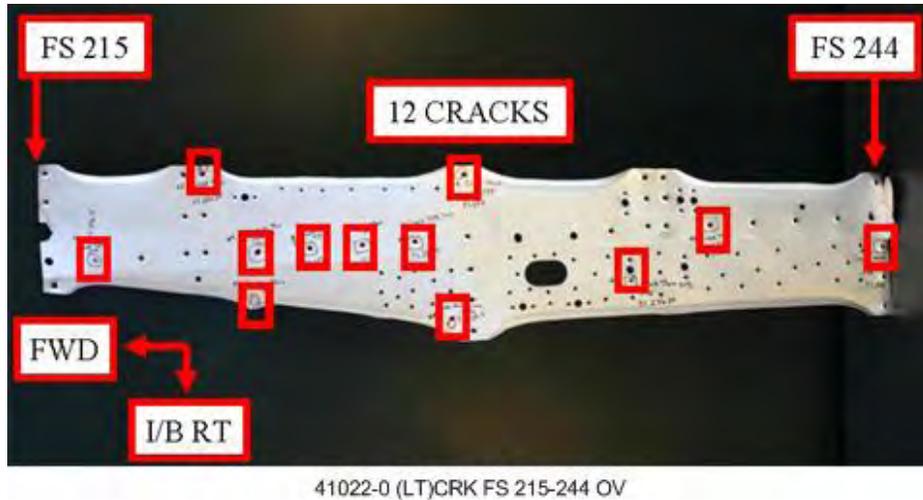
Location of 12 Cracks on the Left Inboard Floorboard Assembly FS 215 Through FS 244
